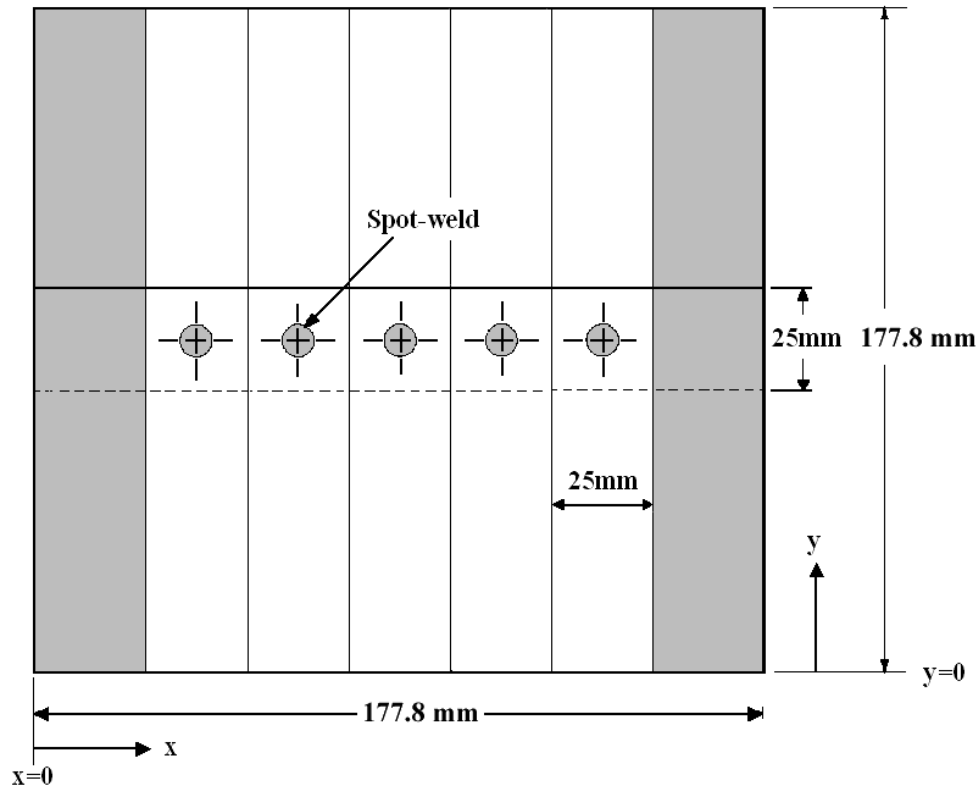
Schematic diagram of the test specimens used for the thermographic and acoustic resonance measurements showing the dimensions of the lap joint and the positions of the welds on the spot-welded joints. The vertical lines indicate where the plates were cut to make the individual specimens subjected to mechanical strength testing.
